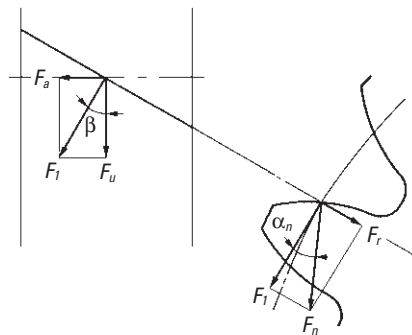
Forces Acting on a Helical Gear Mesh
